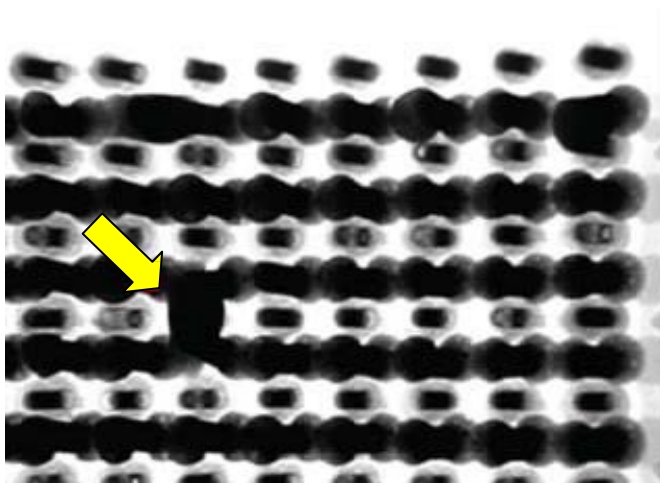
X-radiograph of CGA mounted on PCB showing solder bridge: Reject
